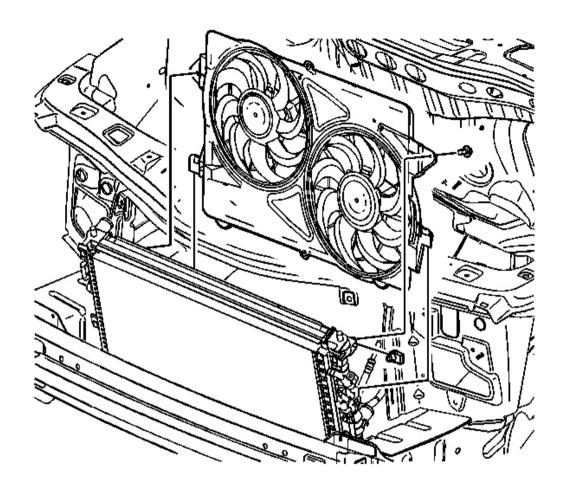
View Of Fan Assembly Bolts From The Radiator Courtesy of GENERAL MOTORS CORP.
